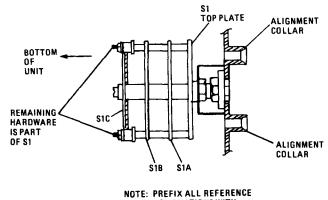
DETAIL A. COMPONENT LOCATIONS -AS VIEWED FROM TOP OF ASSEMBLY.
